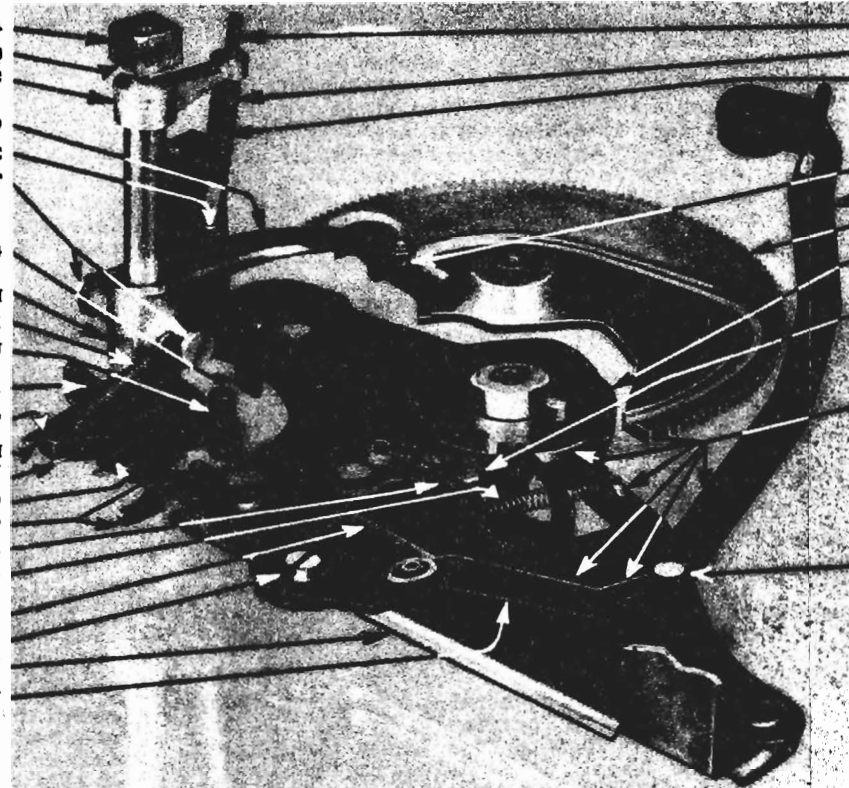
Photo C-D. View of Sub-Plate Assembly, Together with Certain Other Assemblies
